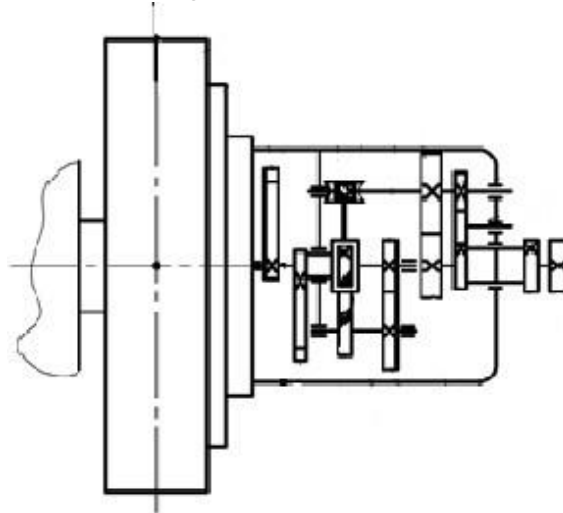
Manually operated balancing device of abrasive wheel grinder.
